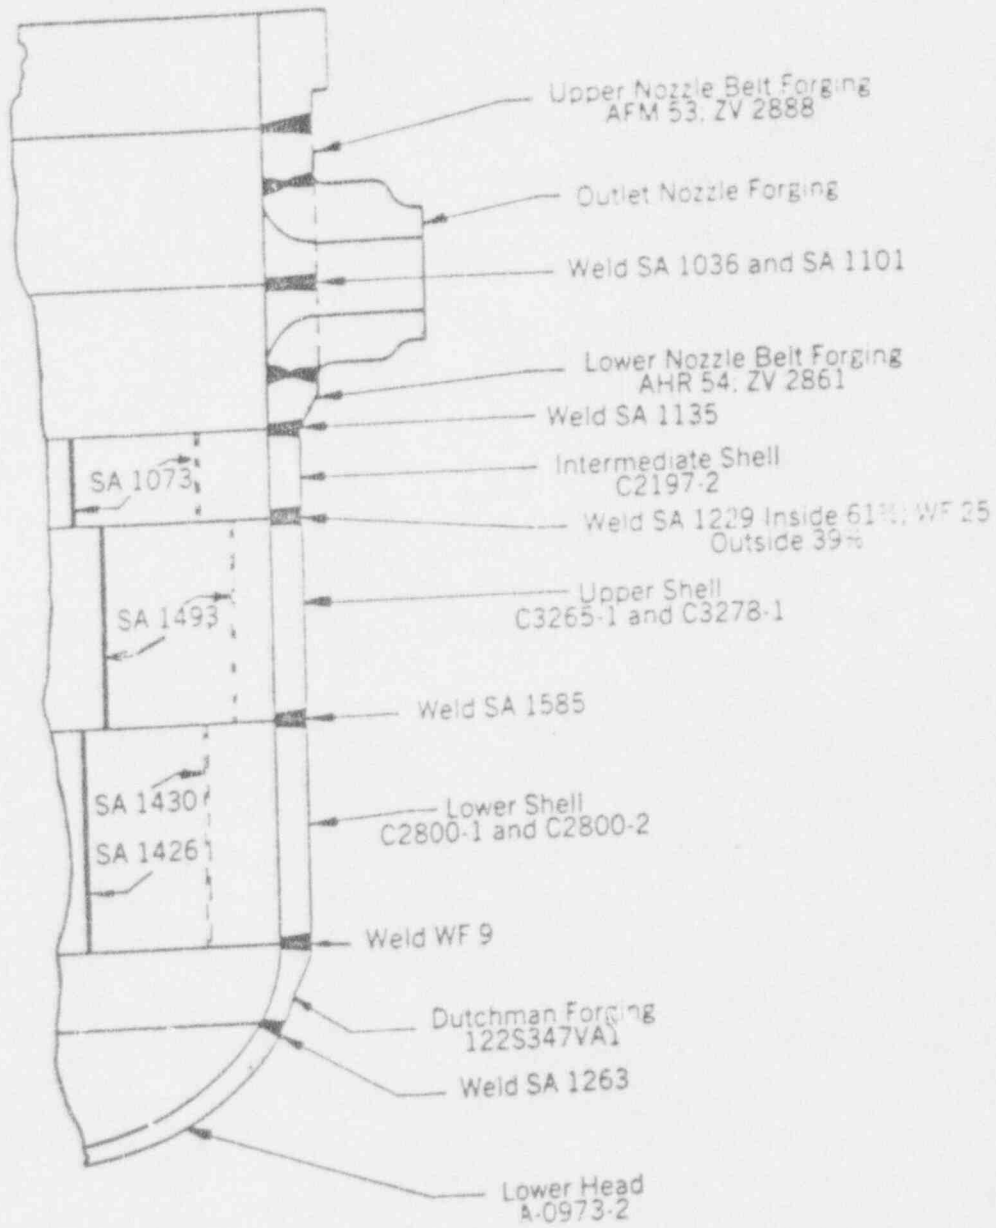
Longitudinal Welds in Reactor Vessel of Coonce Unit
